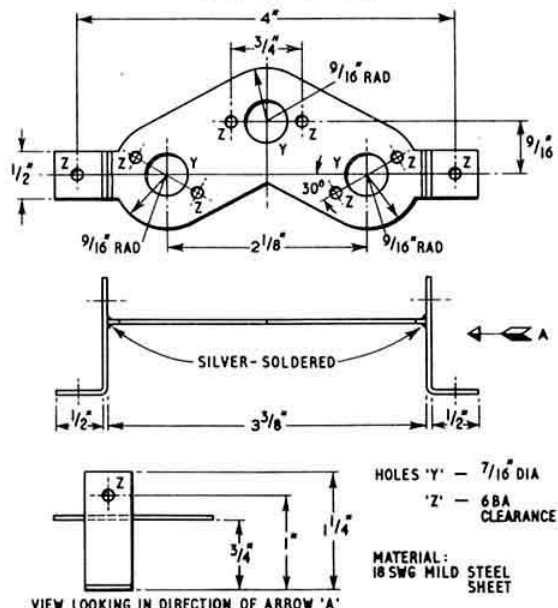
The internal control mounting formed from 18 s.w.g. mild steel.
